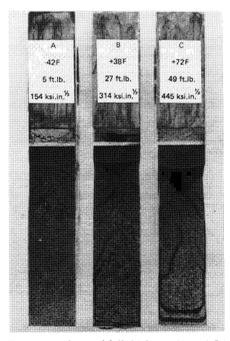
Fracture surfaces of full-thickness ($\beta = 1.5$ in.) 4 - Tcompact-tension specimens of A572 Gr. 50 steel tested under load-control conditions using a total unload/reload loading sequence
